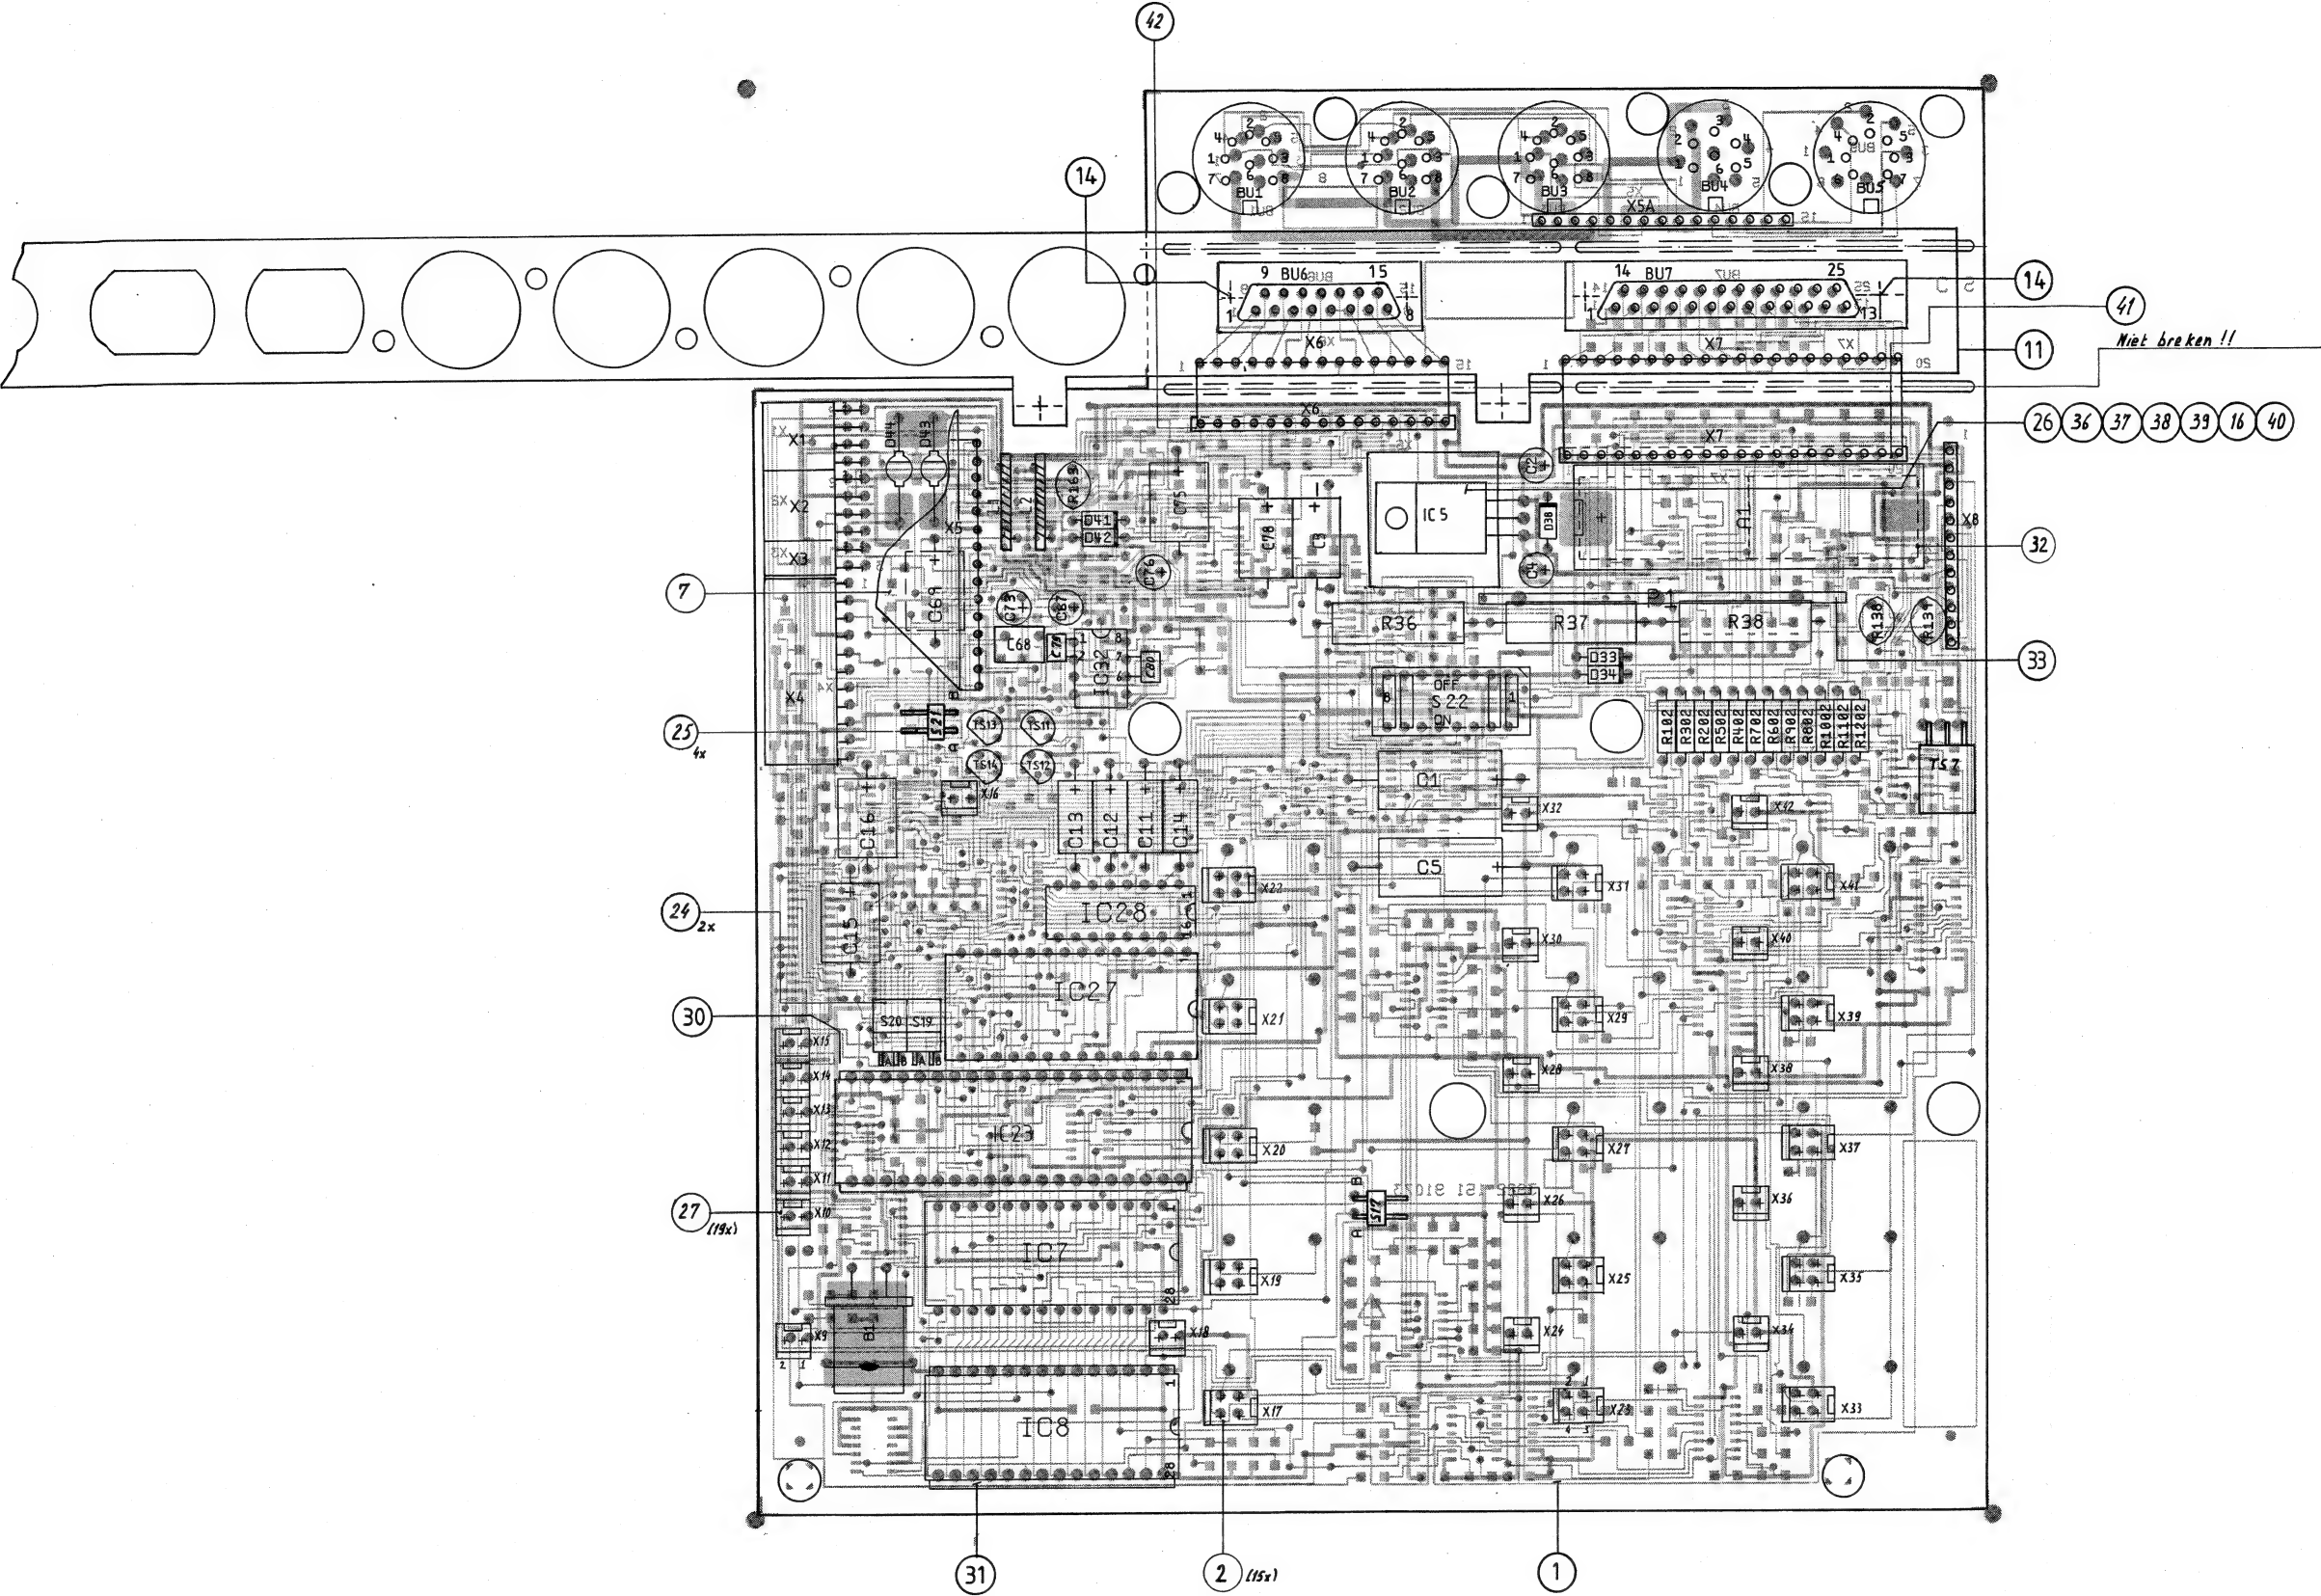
ASSEMBLY DIAGRAM OF LBB 3386/01, TOP SIDE
